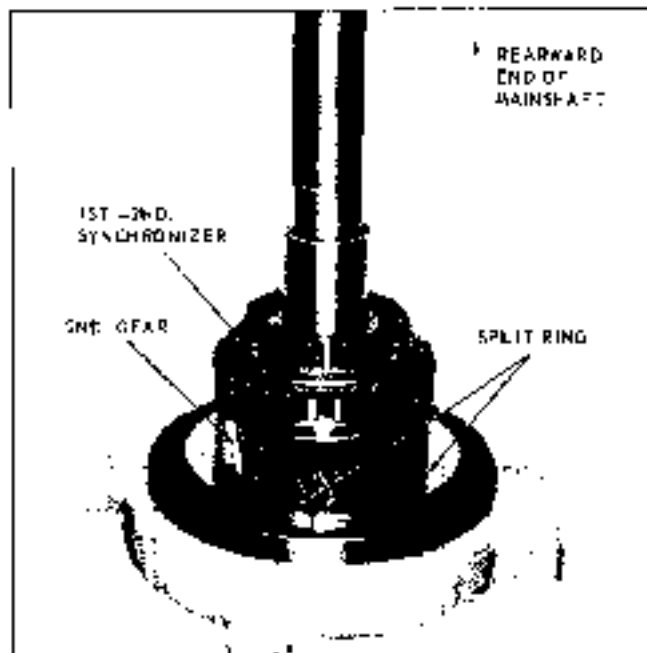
Removing 1st and 2nd Synchronizer and Second Gear
